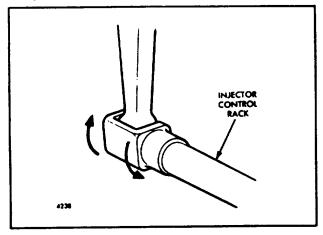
Checking Rotating Movement of Injector Control Rack
